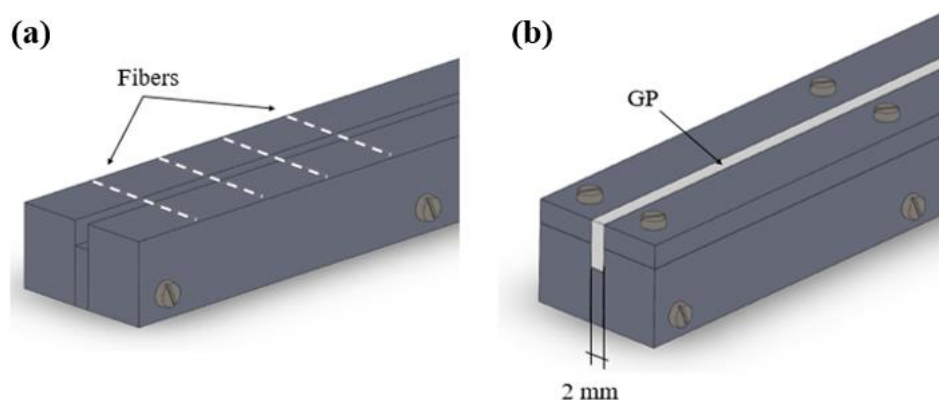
Schematic view of the mold for single-fiber pullout specimens: (a) fiber positioning and (b) matrix casting.
